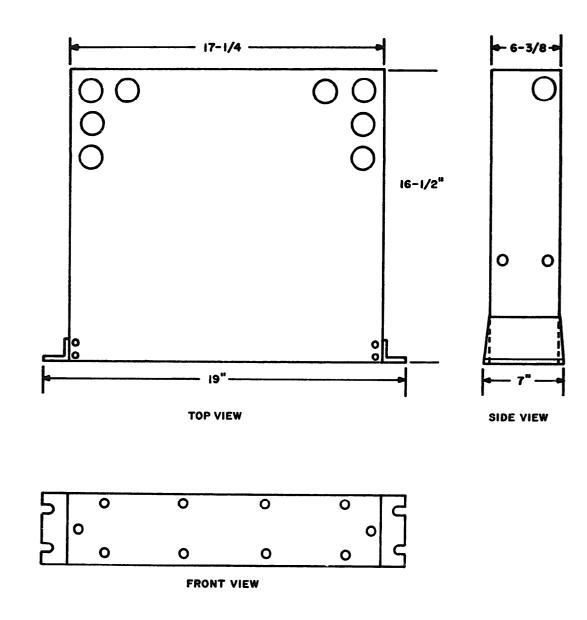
PP-6650/U Power Supply Assembly, Outline Dimensions.
